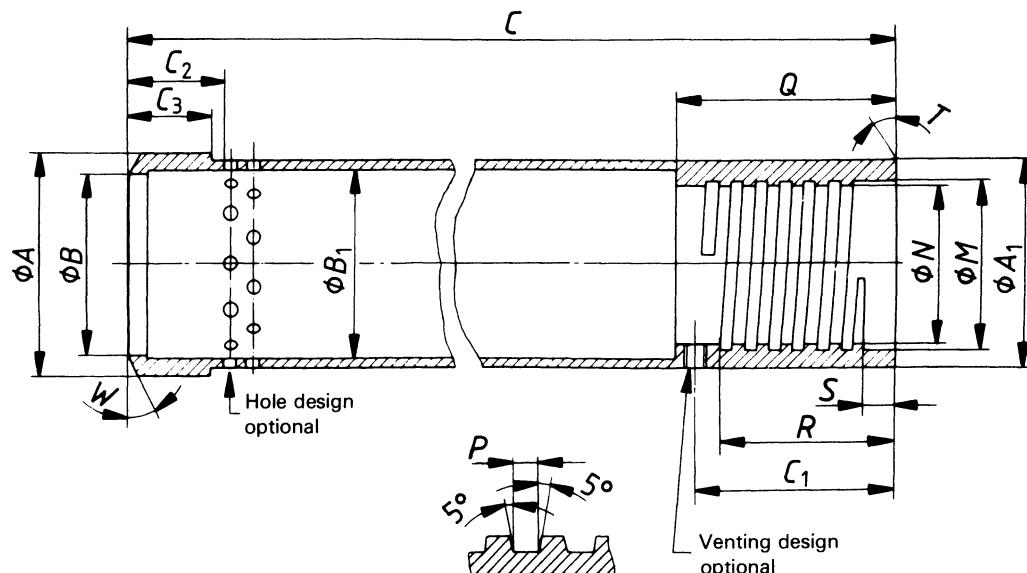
“WT” design double-tube core barrel — Inner tube (see Table 49)
